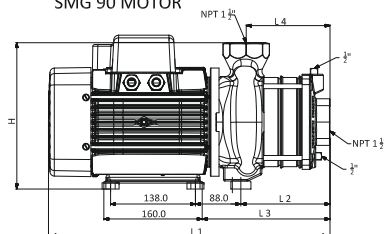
Dimensional sketches, SH,SHI,SHN-12
